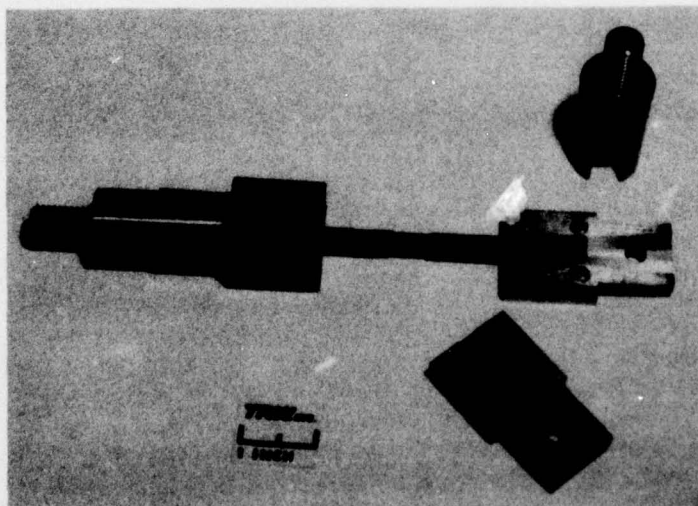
Stress Rupture Grip Assembly and Machined Specimen.
